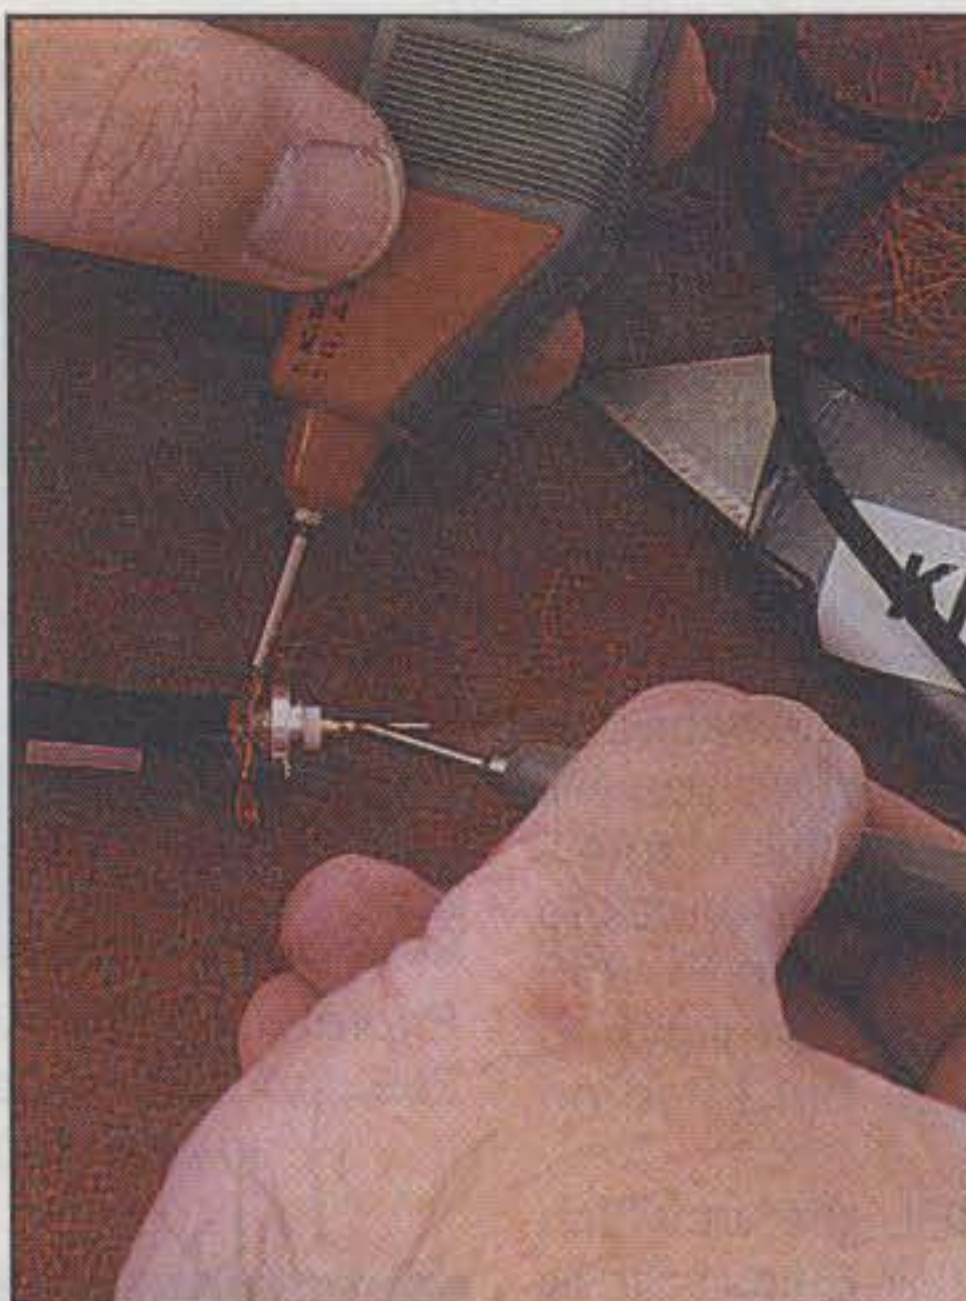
Check for short circuits between the center pin and shield as you assemble any connector.
